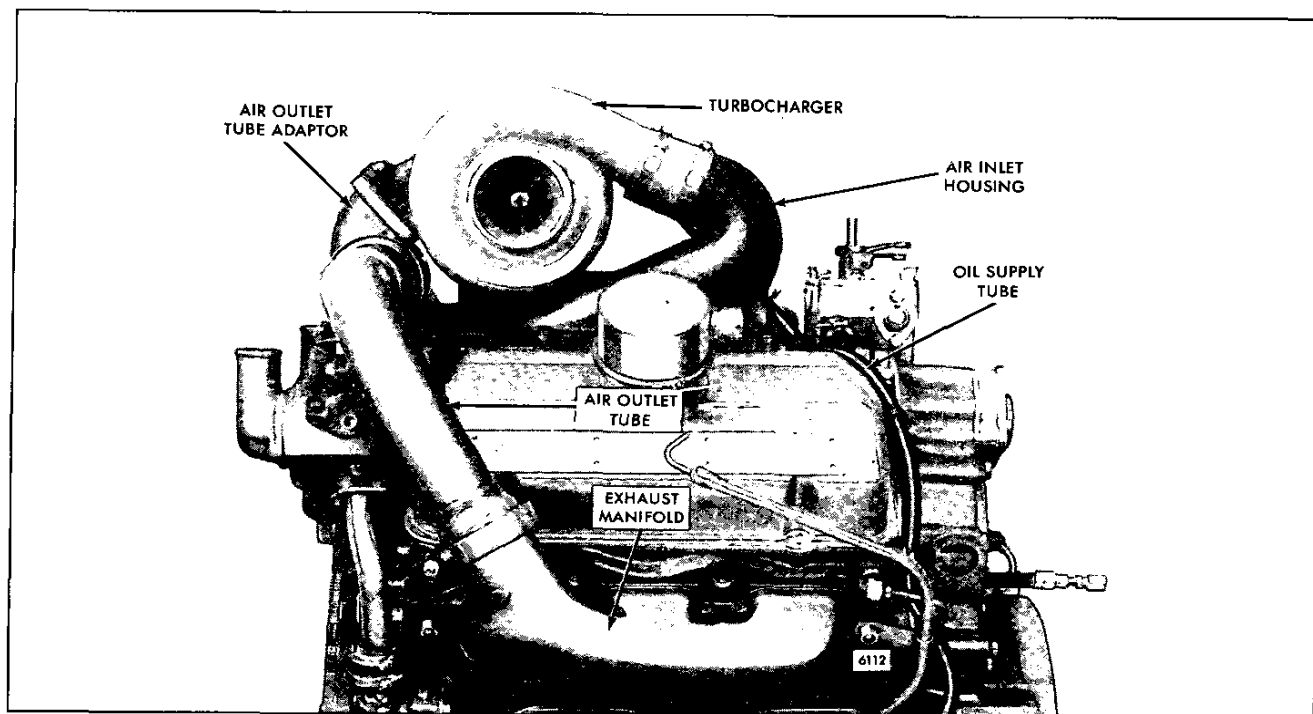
TV61 Turbocharger Mounting (6V Engine)
